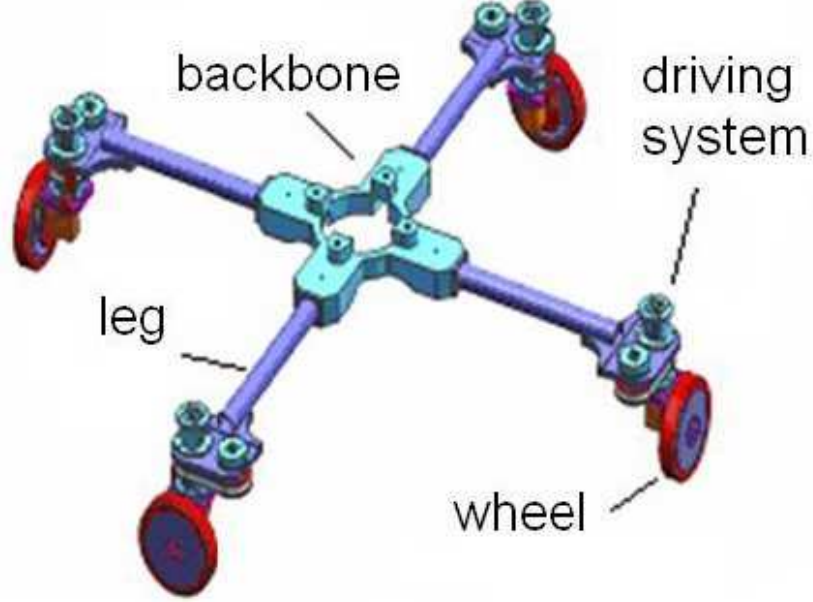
Backbone, leg and wheel parts of the mobile robot
